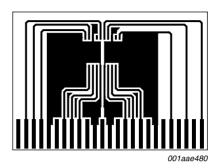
PCB used for thermal tests; heat sink area 400 mm²
